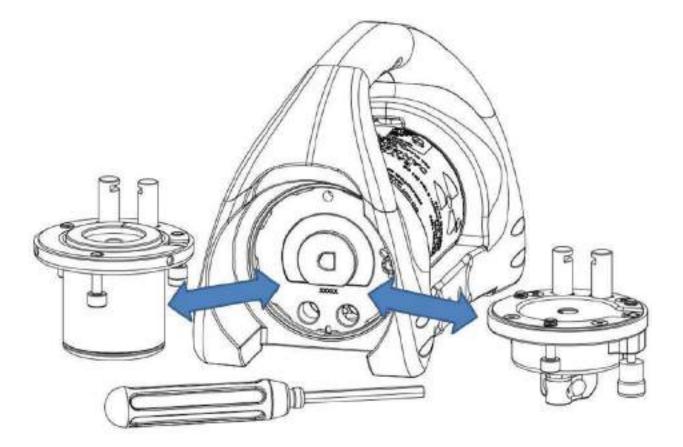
1075 SCAR Pro with Outlet Port Assemblies Removed
